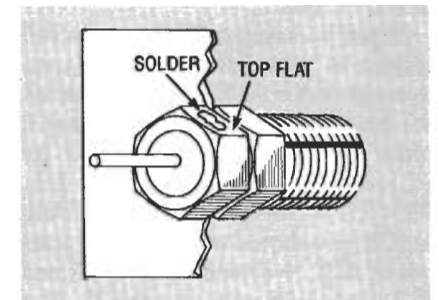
HERE'S A TIP FOR constructing a RFI shield. Before soldering the copper tape to the nut flats, tin the flats with a little solder first. The relay is on the underside of the PC board as viewed from this angle.
